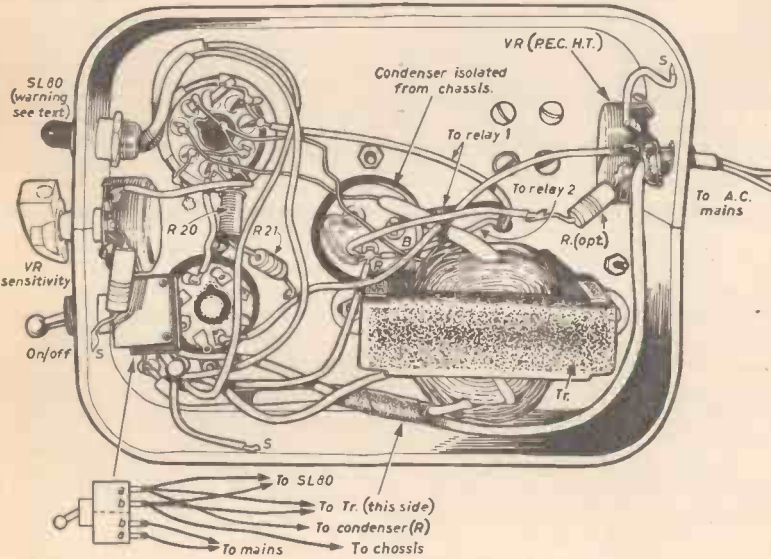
Underside views of Unit No. 3, showing wiring.
